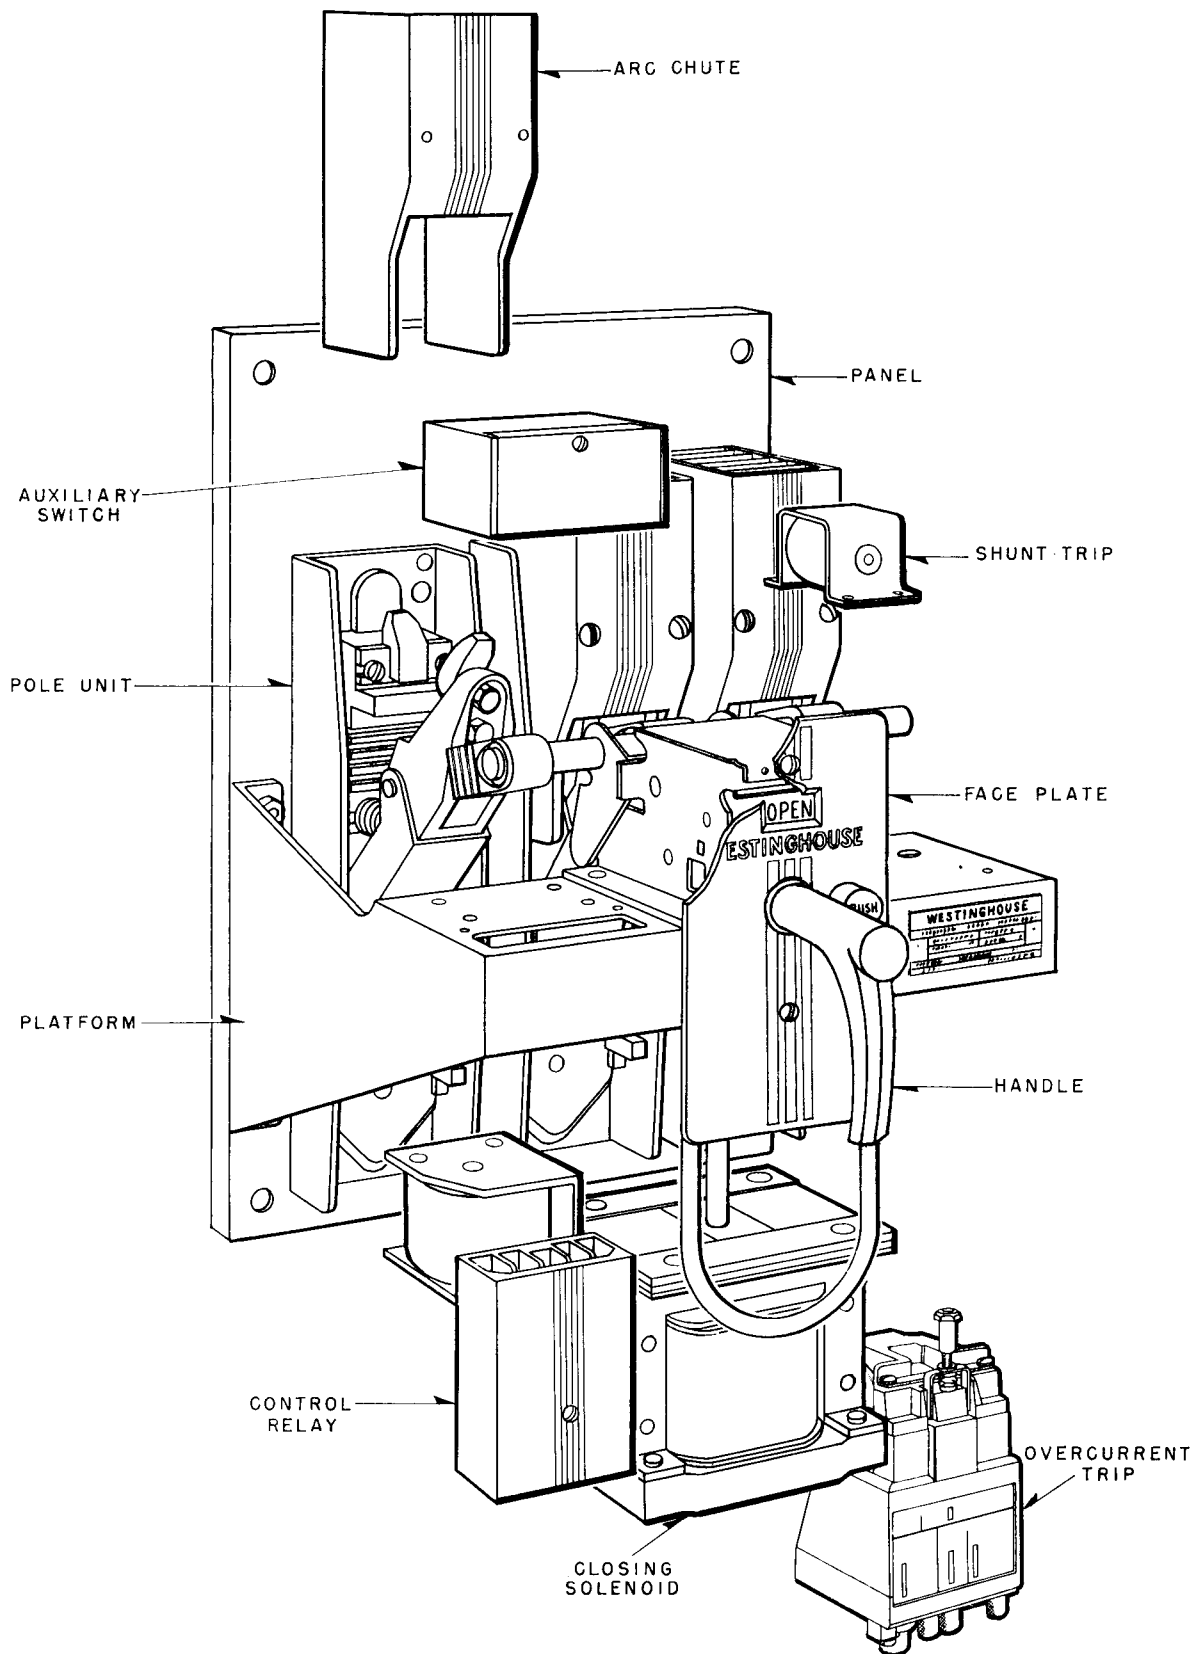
Type "DB" Air Circuit Breaker—Exploded View
